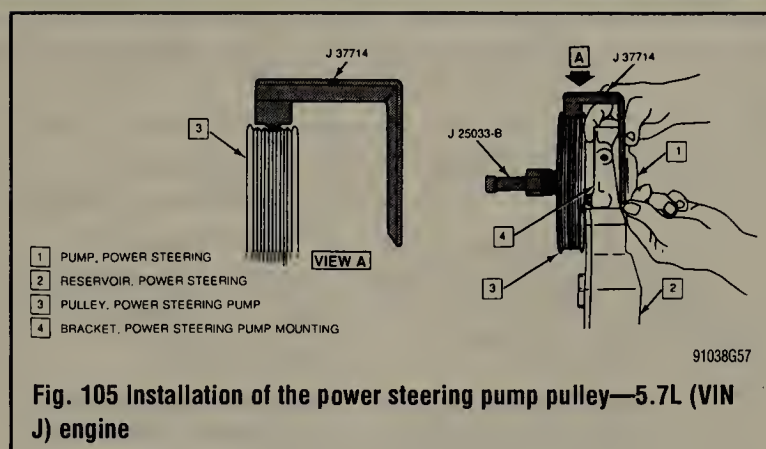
Installation of the power steering pump pulley—5.7L (VIN J) engine
